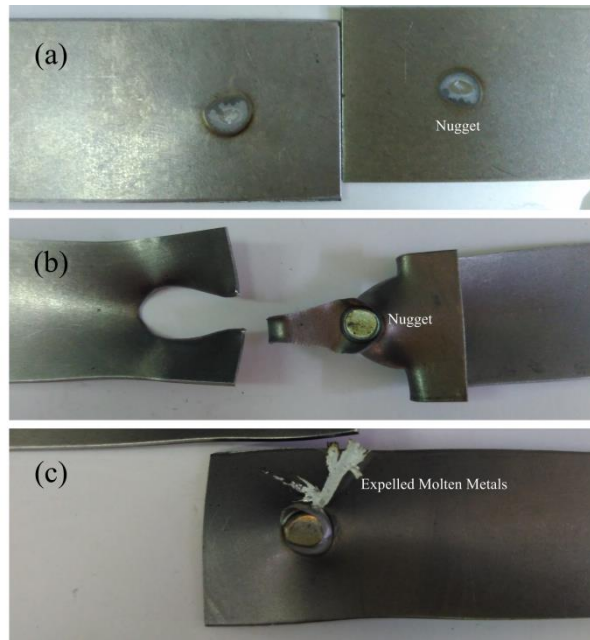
Three types of failure in RSW. (a) cold weld. (b) good weld. (c) expulsion
